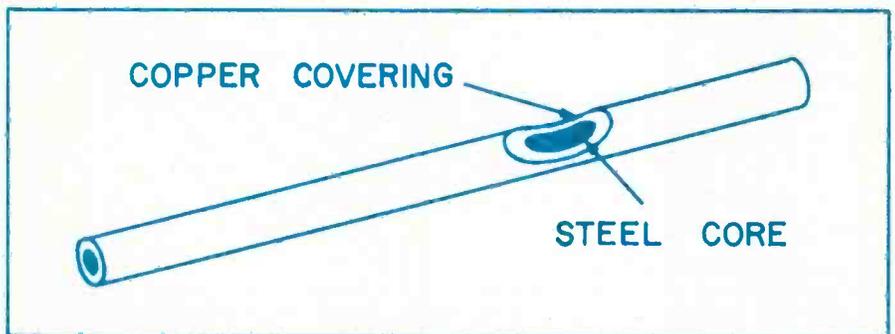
Cut-away section of Copperweld twin-lead conductor.
